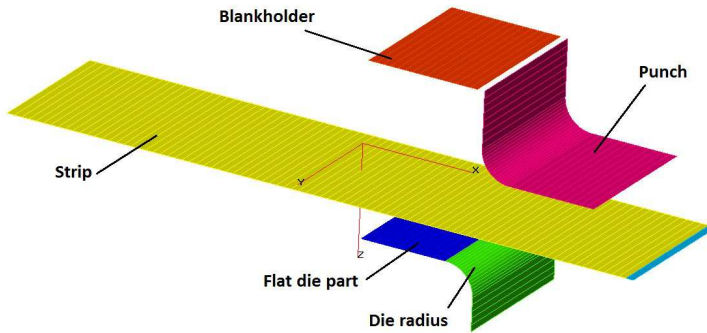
Set-up of strip drawing simulation - strip bending and pulling
